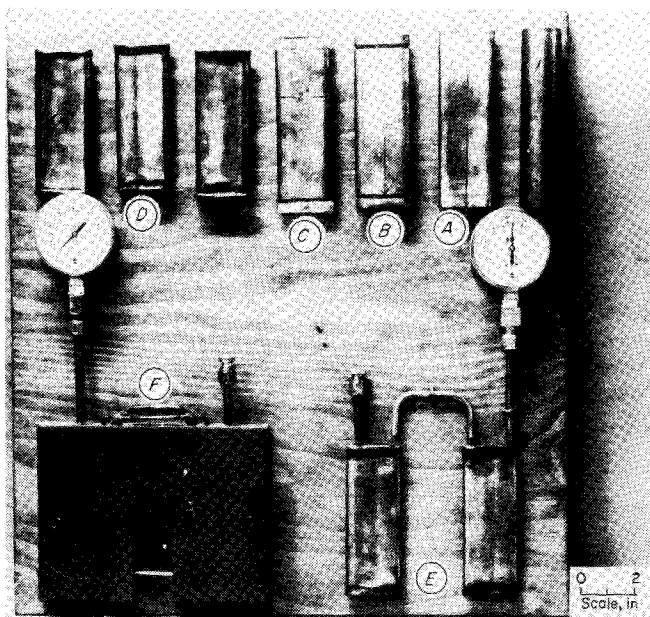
Steps in fabrication of a roof bolt U-cell. A, Copper tube cut to length and flattened to 1/4 in; B, top half of ends cut; C, top half of ends removed; D, bottom of ends folded up and brazed to top; E, cells drilled and ready for connection of gauge, crossover tubing, and relief valve; F, completed cell.
